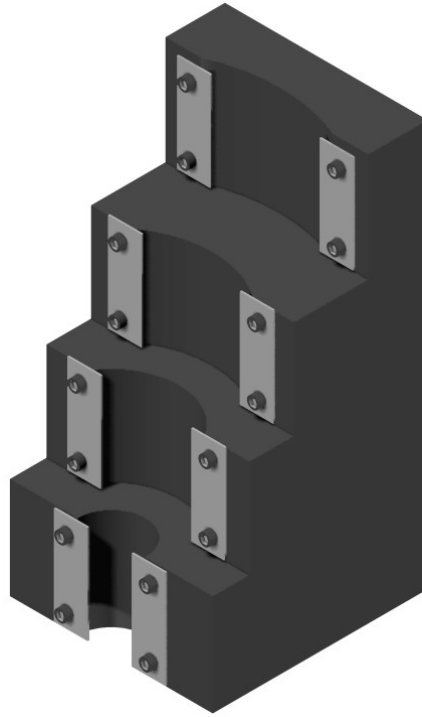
Computer aided drawing of the fixture used to impose external compressive stress.
